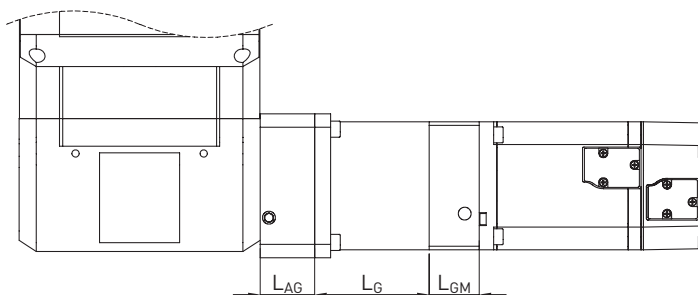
Motor connection of linear table HT-B with gearbox
